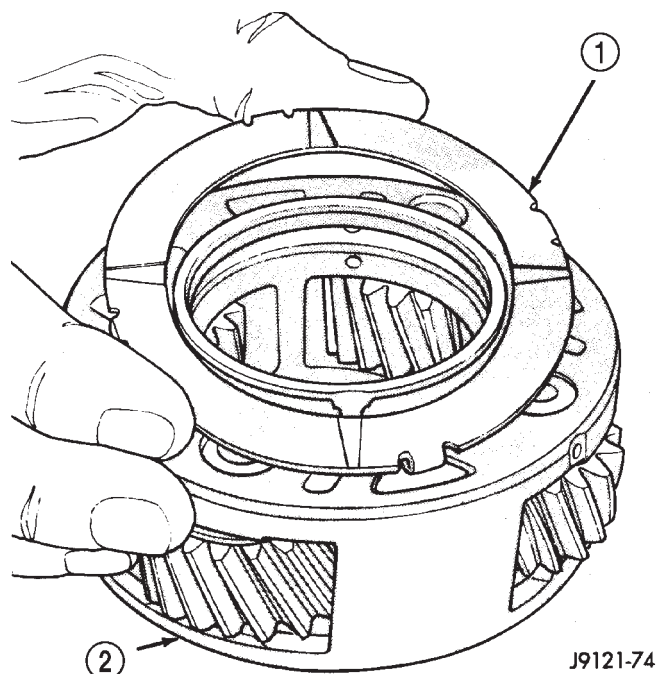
Installing Thrust Washer On Front Planetary Gear
